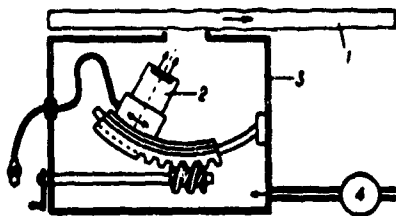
Schematic drawing of sheet inspection using the immersion version of the ultrasonic echo method with use of normal ultrasonic waves. 1) The sheet being inspected; 2) head with adjustable angle of ultrasonic vibration direction; 3) housing filled with an immersion fluid; 4) pump.
